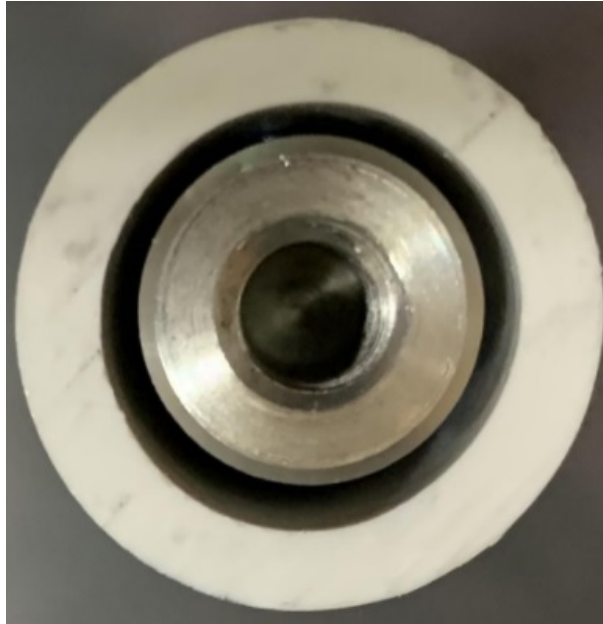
Top View Cross Section of PVC tube with Inner Metal Support Tube
